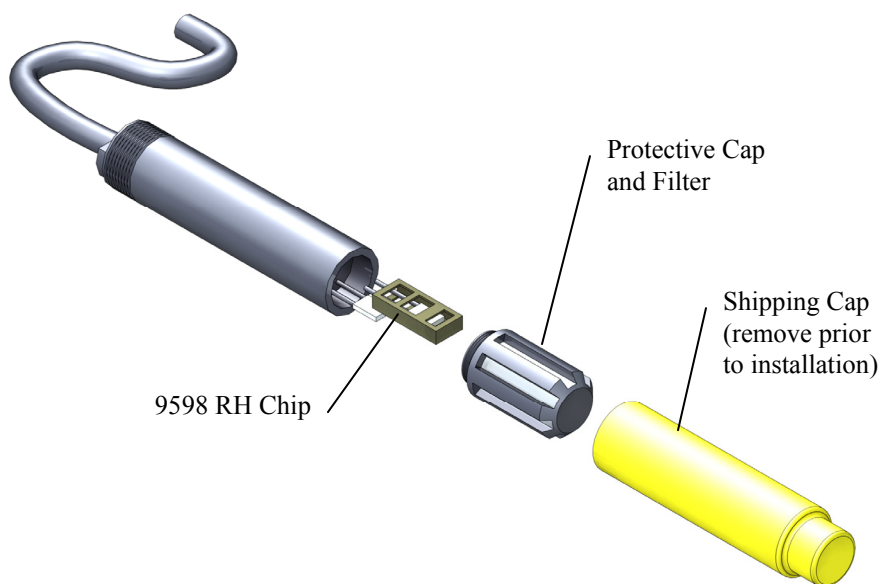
Exploded View of HMP60-ET (as shipped)
